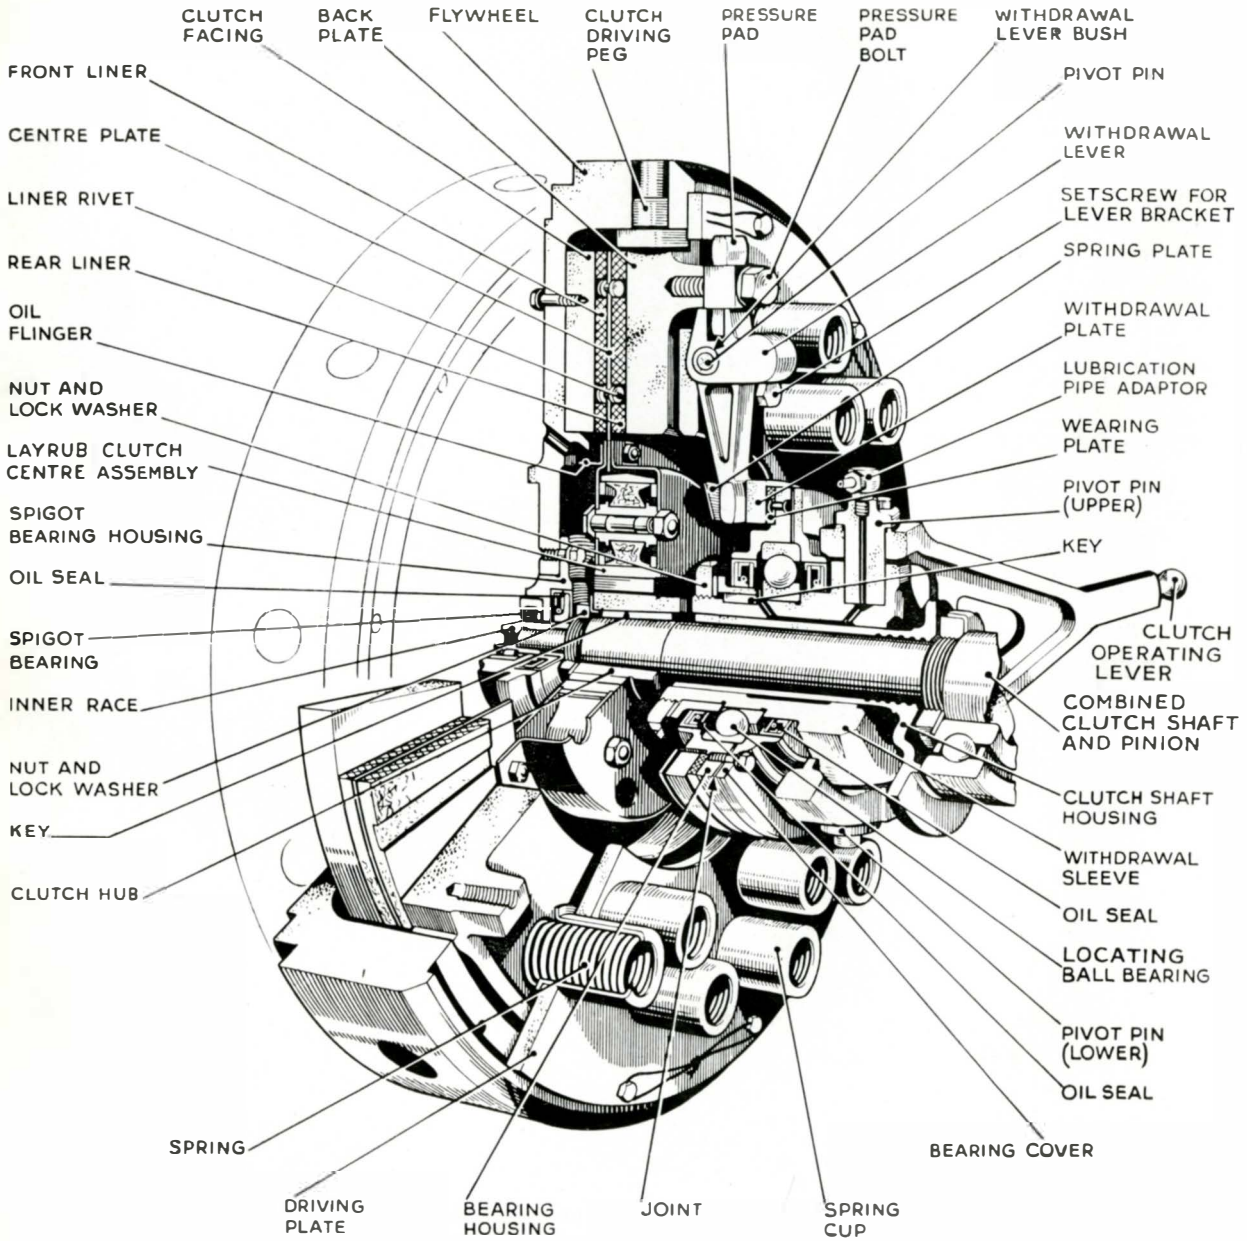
CUT-AWAY VIEW OF THE CLUTCH ON THE PASSENGER VEHICLE
